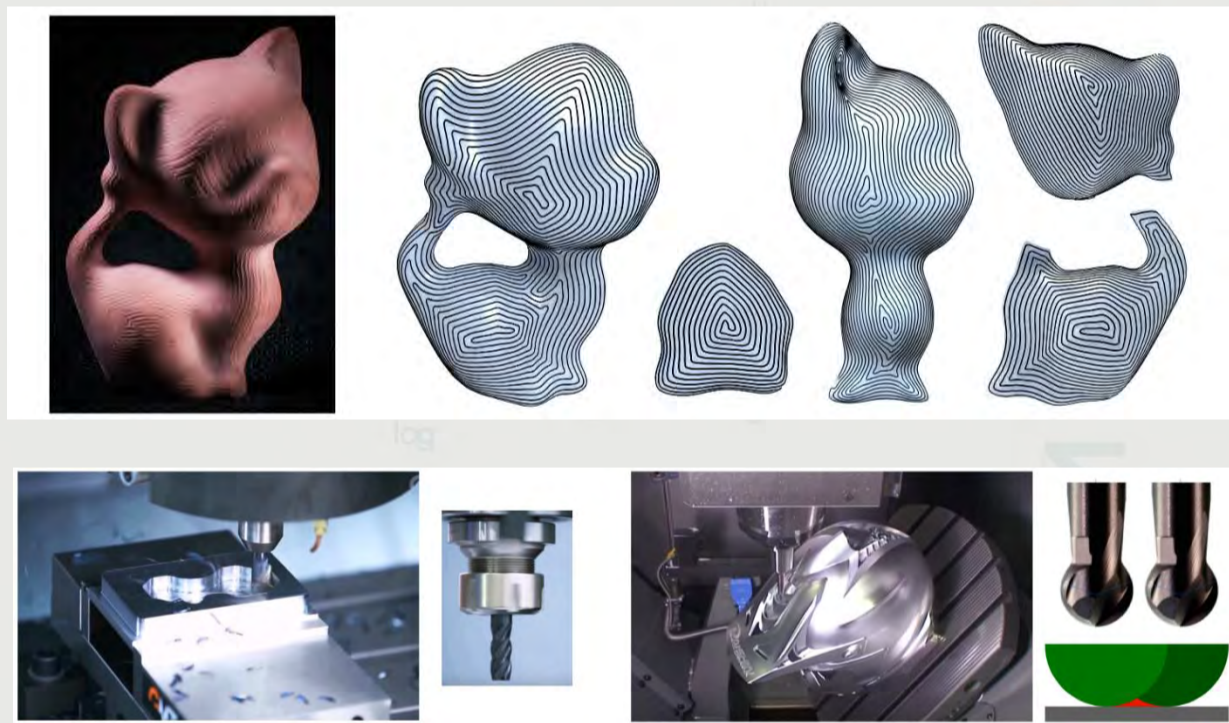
3-axis pocket milling (left) with a square cutter vs. 3+2-axis machining (drill on top) with a ball cutter. Scallop (red) is the material residual left between adjacent ball cutter (green) paths.
